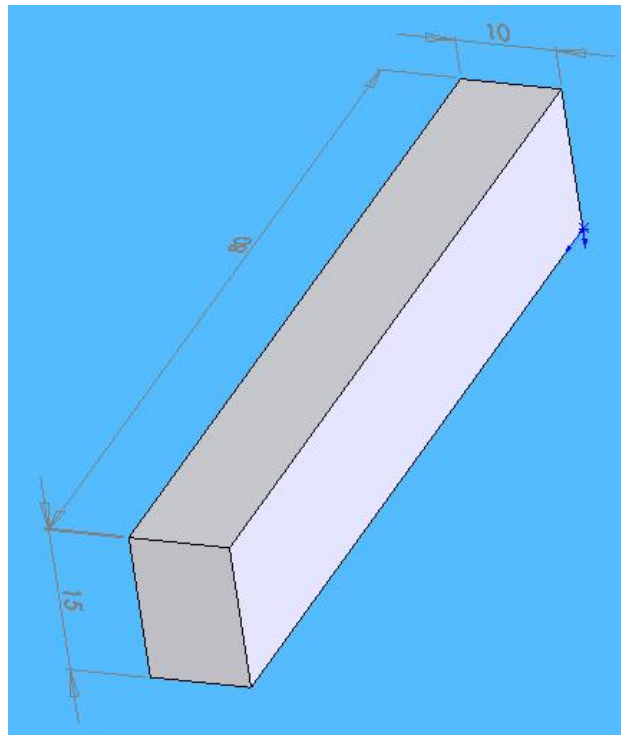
The first step in header fabrication: cutting an aluminum bar to size and squaring off the faces
